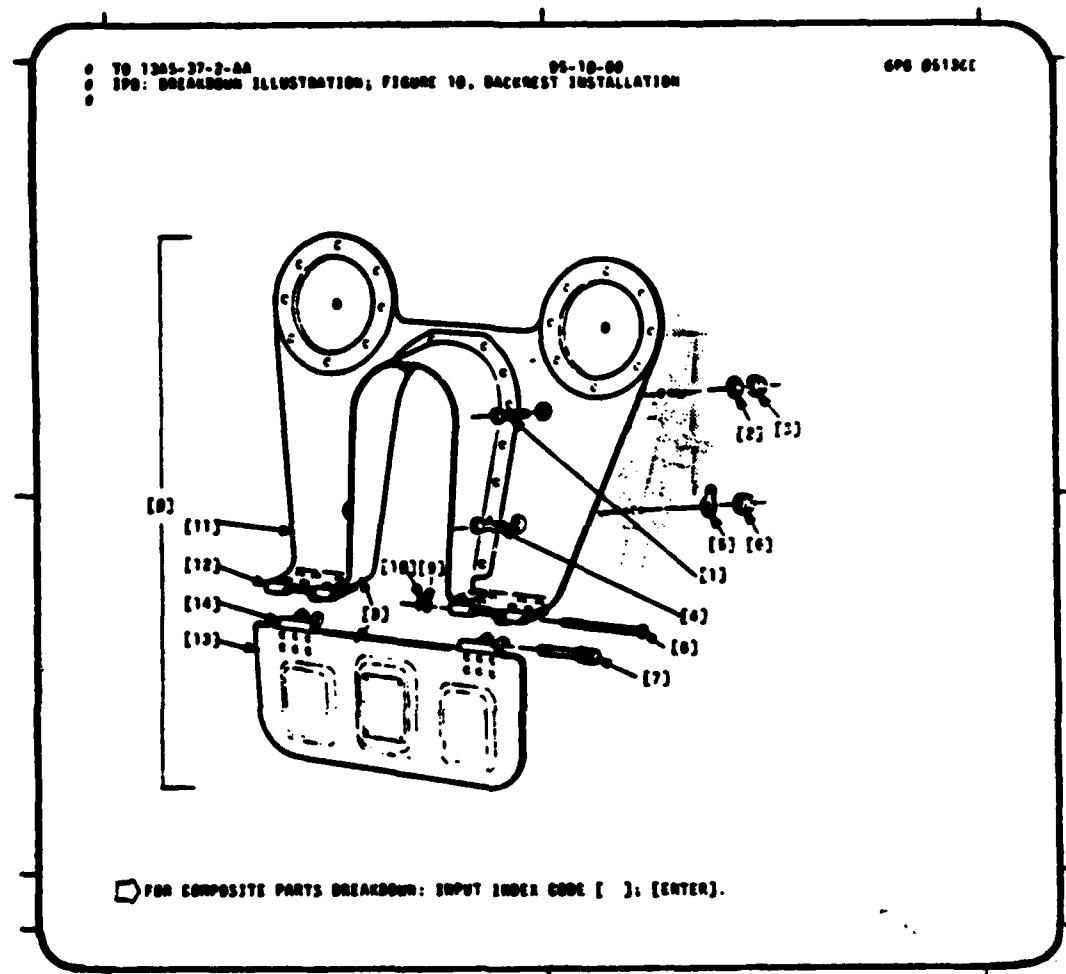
Example of IPB Composite Parts Breakdown (CPB) Frame (Exploded View of Simple Mechanical Assembly).
